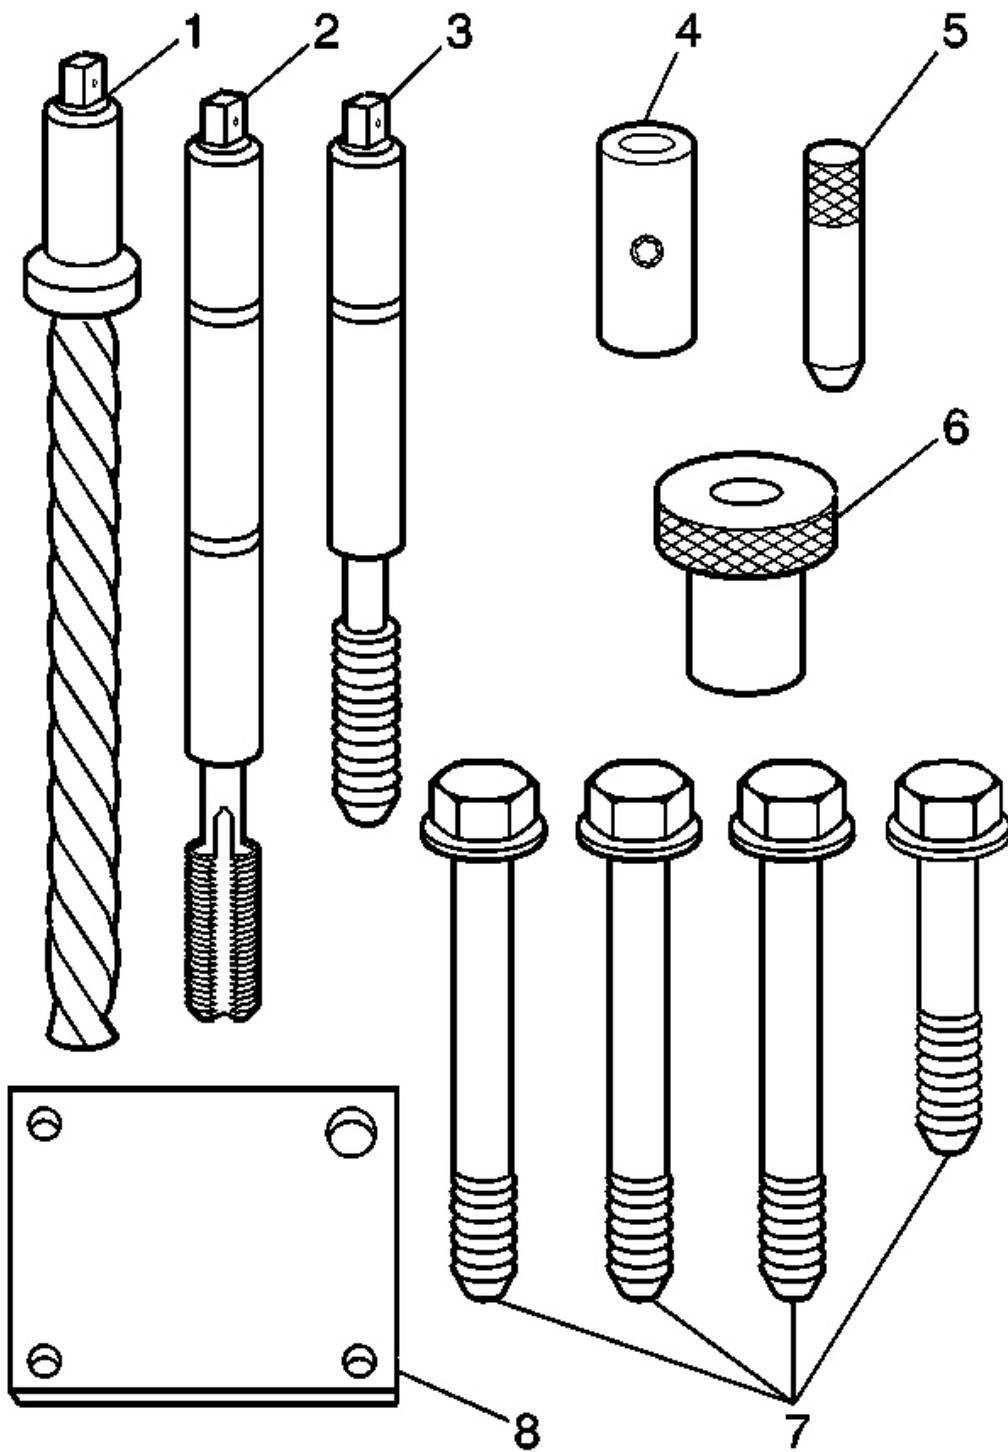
View Of Cylinder Head Bolt Hole Thread Repair Kit
